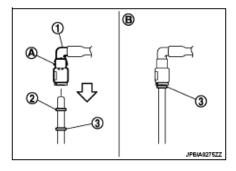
Identifying Fuel Feed Damper Side Courtesy of NISSAN MOTOR CO., U.S.A.
